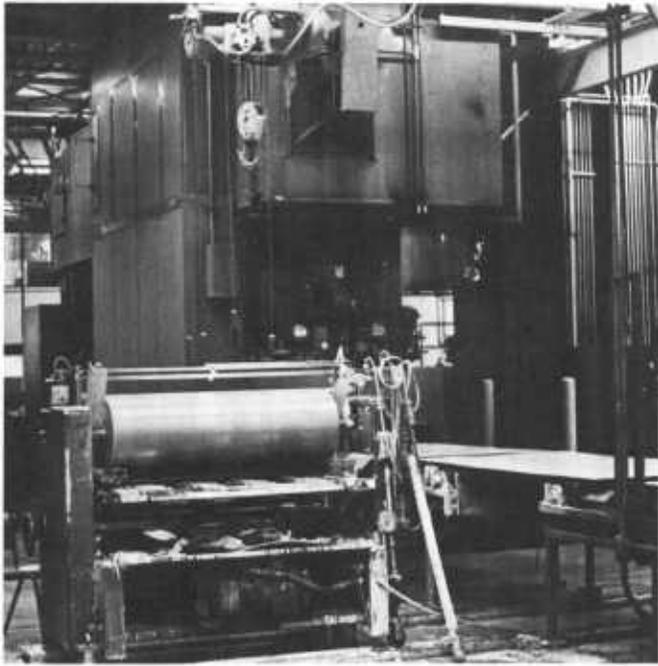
High-velocity hot-air dryer for drying fill coat. This dryer is similar to that shown in figure 290, except that it is equipped with an incinerator for burning evaporated solvent and heat exchanger for recovery of heat of combustion. Both elements are housed in superstructure. Precision roll coater in foreground is mounted on tracks and temporarily removed from line.
